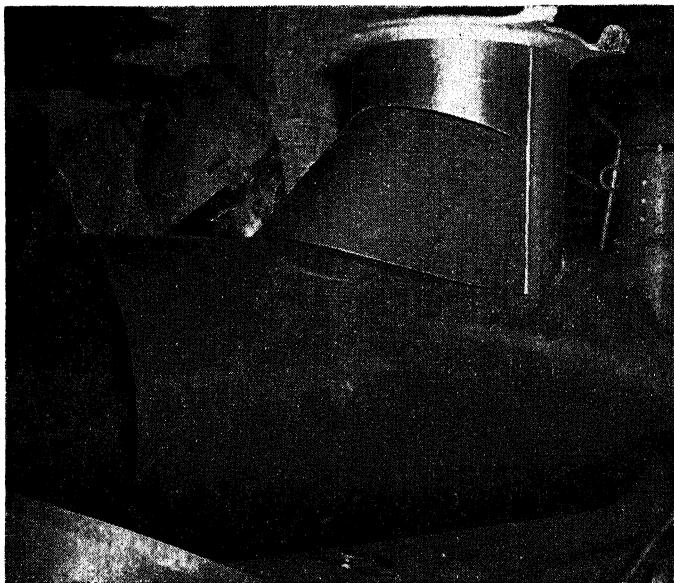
Fabricating aluminum laundry chutes by arc welding. This shop also arc welds a large number of stainless steel kettles for a process plant.
